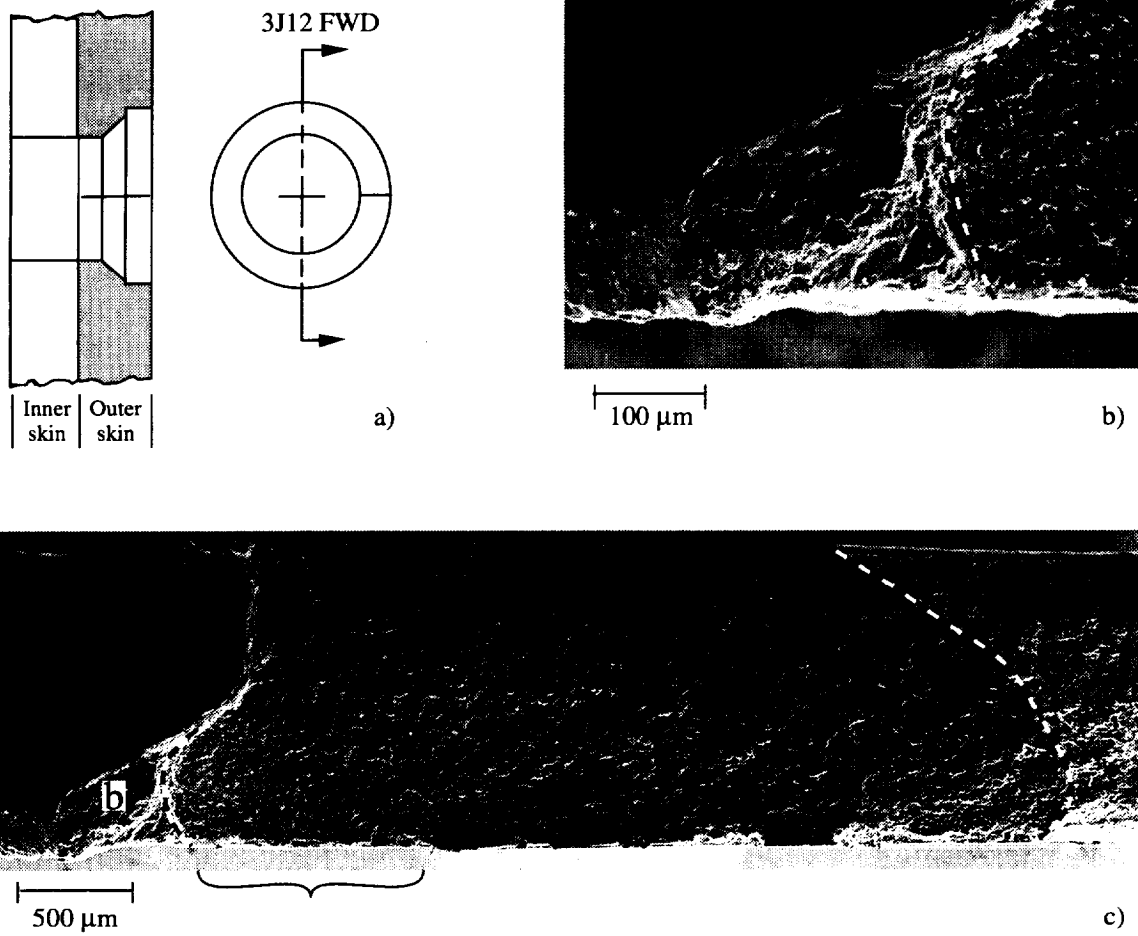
a) The schematic shows the rivet hole 3J12 configuration and the location of the outer skin fatigue crack oriented in the forward direction and about the 3 o'clock position. b) The SEM micrograph shows the fatigue crack surface at the rivet hole shank region "b" in Figure 9.27.c. The dashed line marks the fatigue crack front; to the right of the dashed line is the transgranular fatigue crack fracture surface and to the left is a region (ligament) that exhibits a ductile tearing morphology. c) The SEM micrograph shows the fatigue crack fracture surface extending from the rivet hole (left). The bracket marks the likely region of crack initiation along the faying surface and the dashed lines mark the fatigue crack fronts. Presumably, the crack initiated at a site located a considerable distance from the rivet hole, forming a ligament that failed by ductile tearing.
